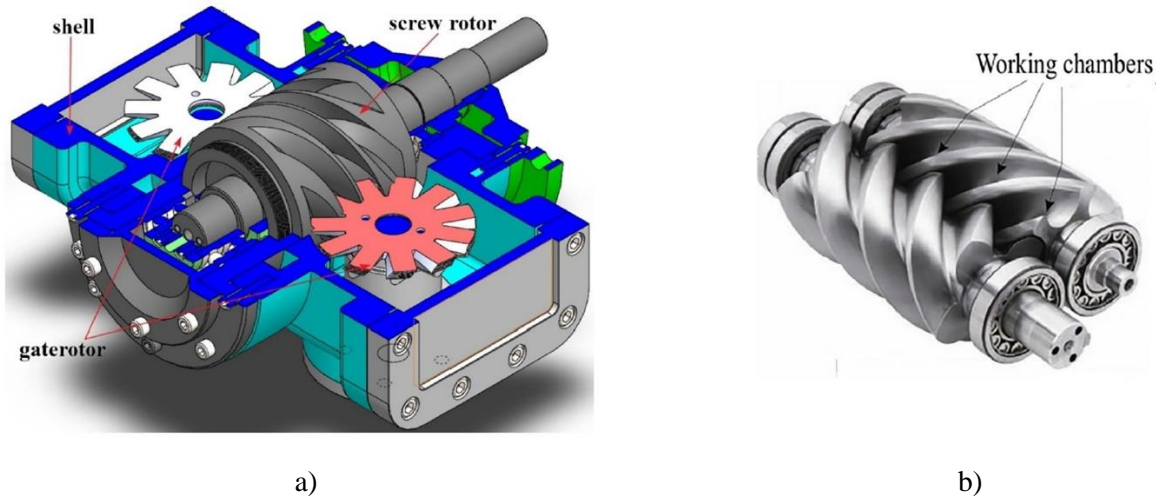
a) single screw expander prototype presented in [33]; b) twin screw expander.
